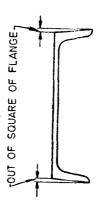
Flanges Qut-of-Square or Out-of-Parallel
